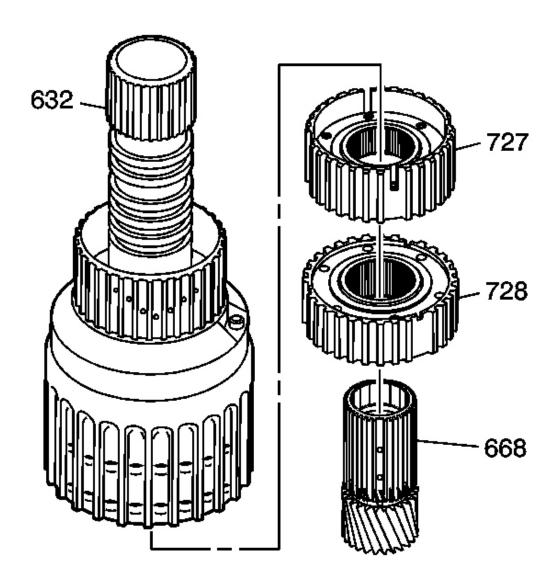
View Of Sprag Clutch Assembly Courtesy of GENERAL MOTORS CORP.
